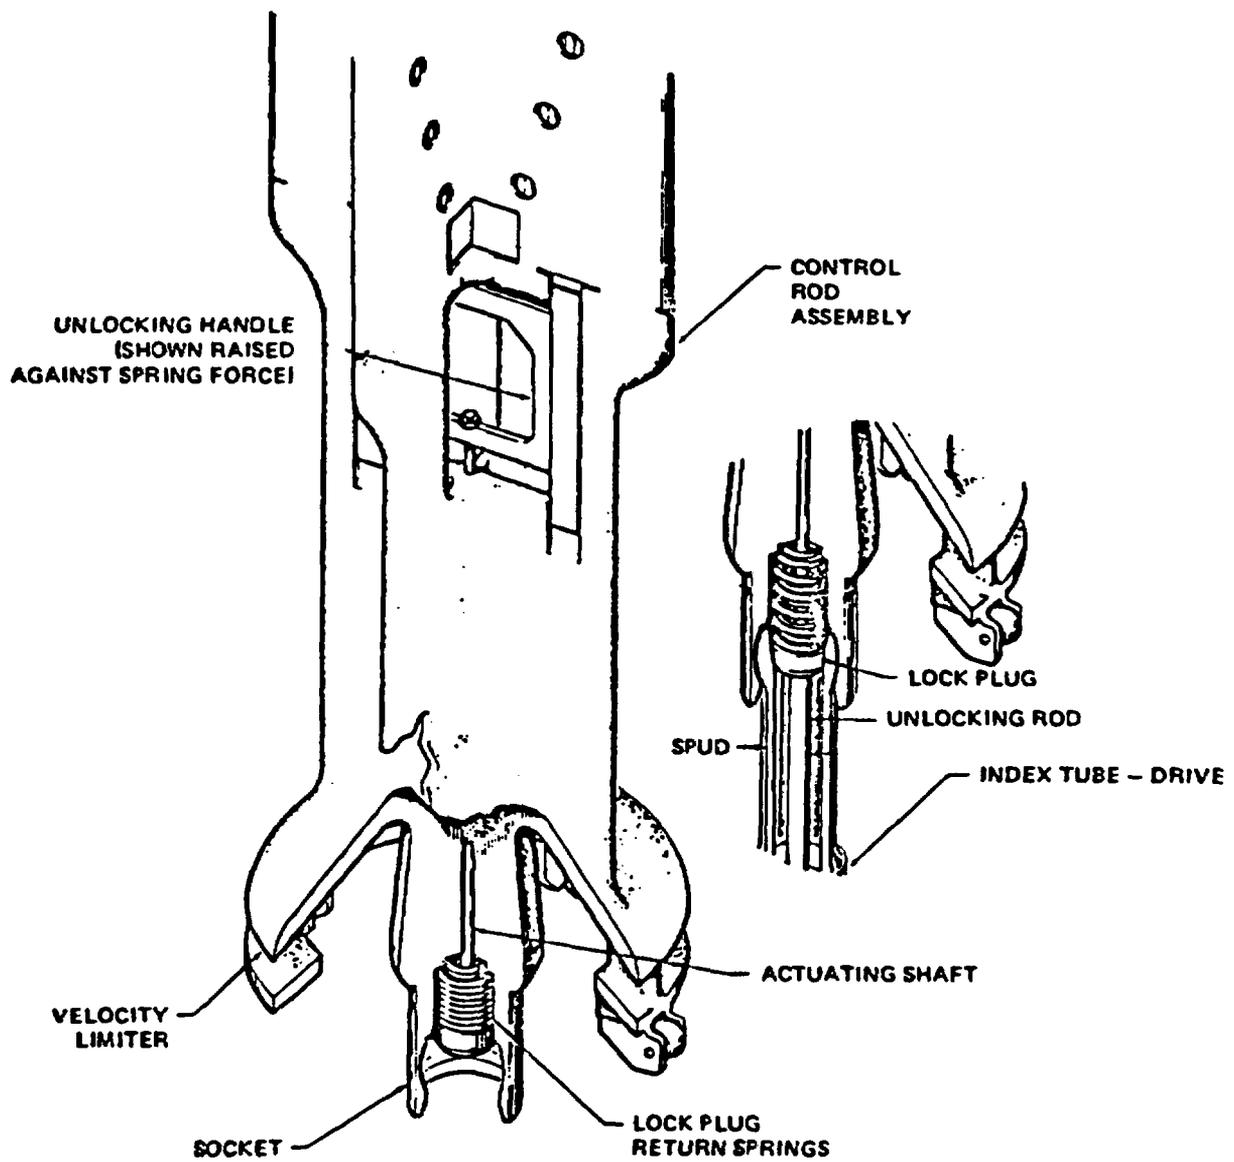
Control Rod Assembly and Drive Coupling Isometric
